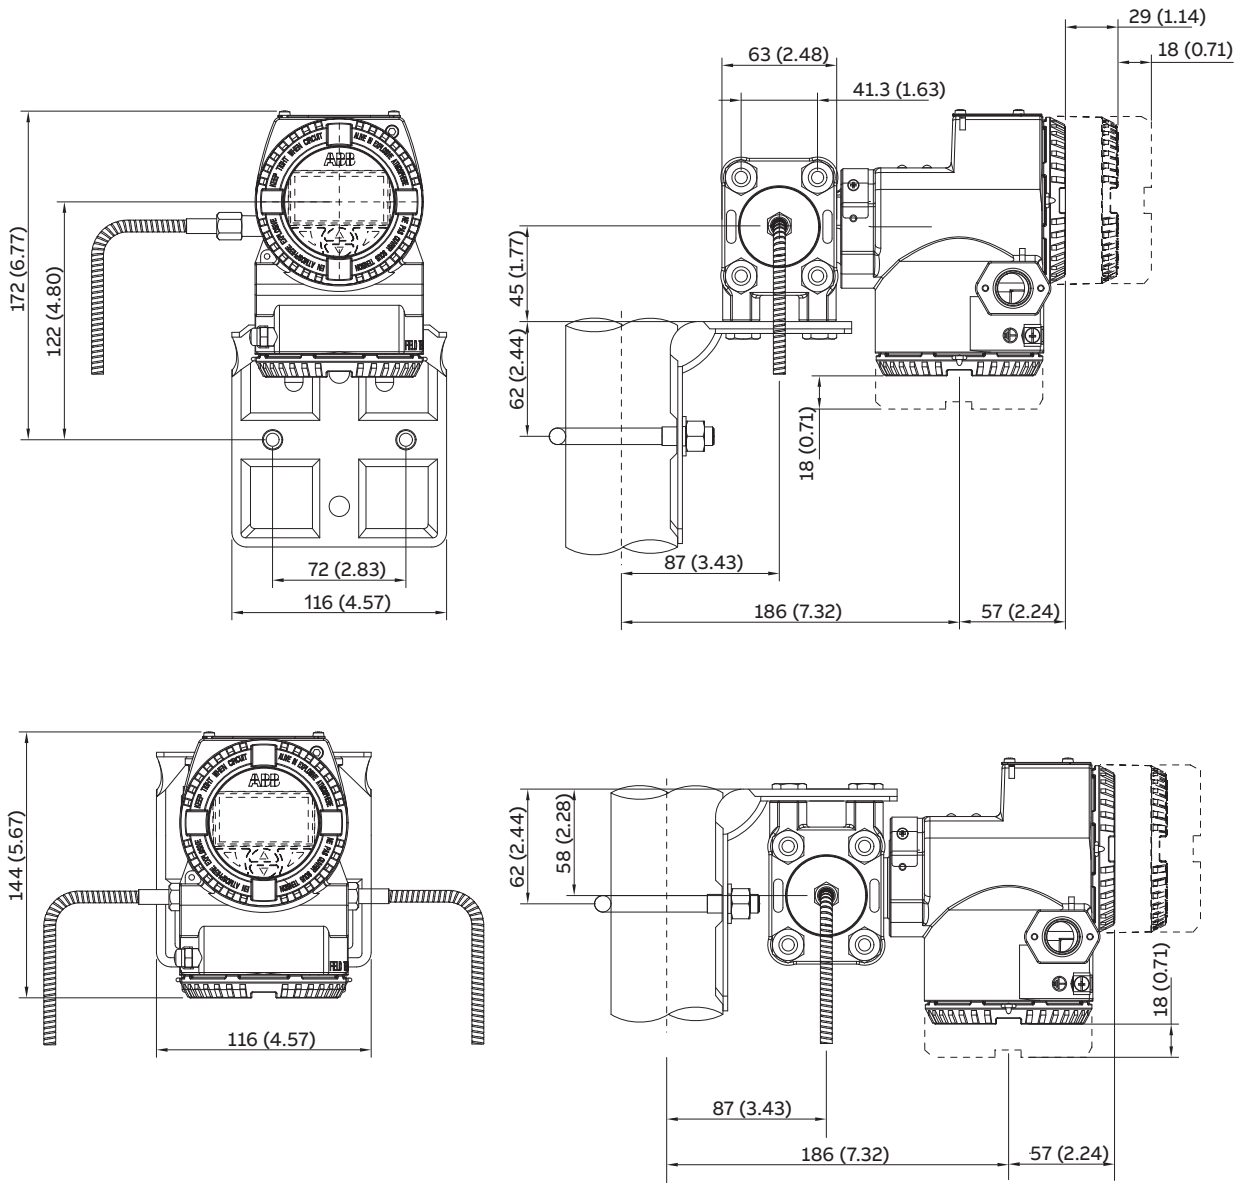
Pipe mounting – DIN housing, Dimensions in mm (in)
